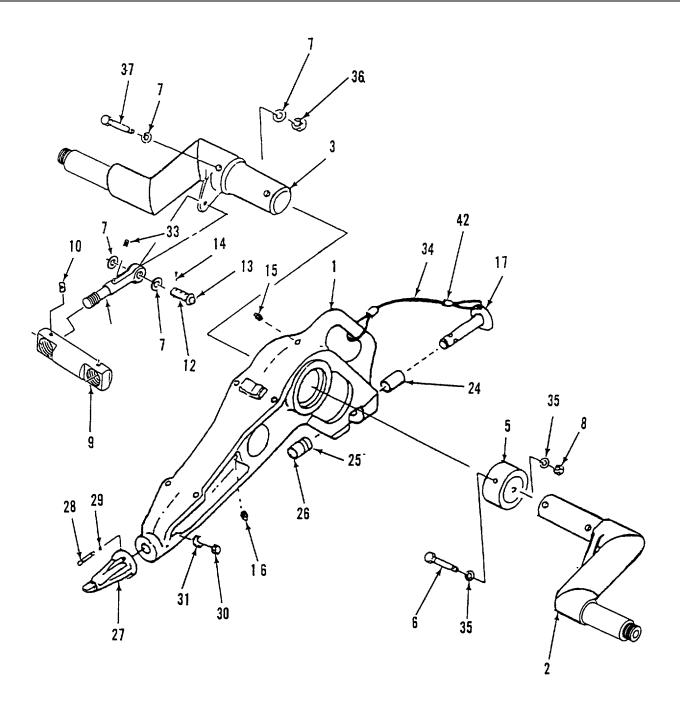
Cradle Assembly Repair, Model 204-050-200-5 (AVIM).
